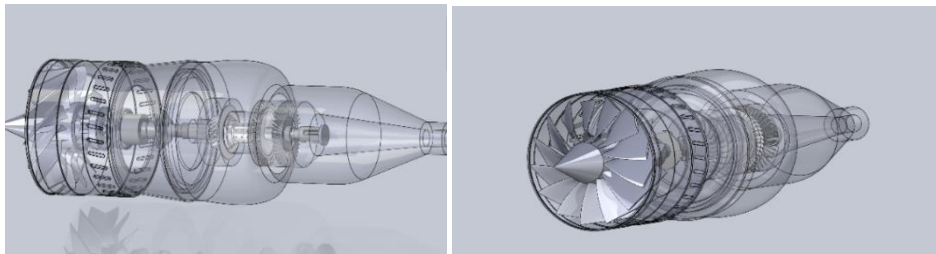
DGEN 380 assembled engine components (left) and components with nacelle cover (right)
